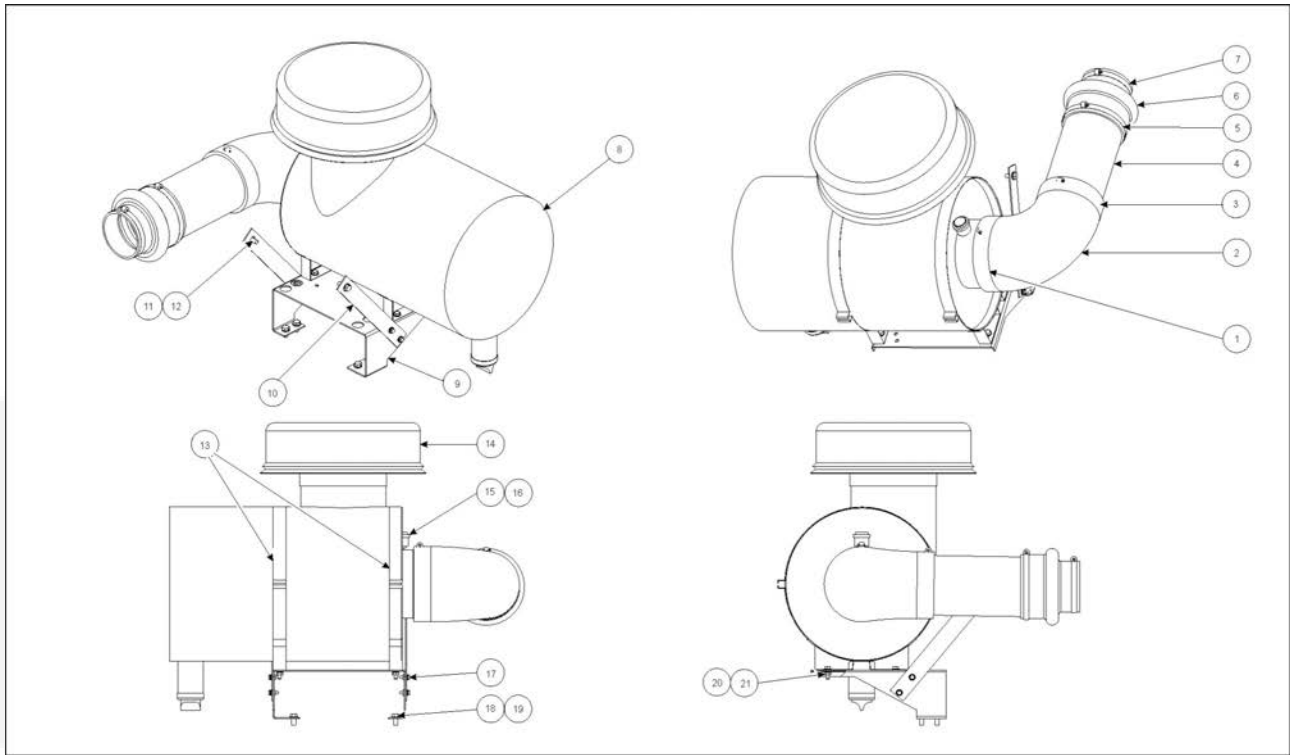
HEAVY DUTY AIR CLEANER PARTS
